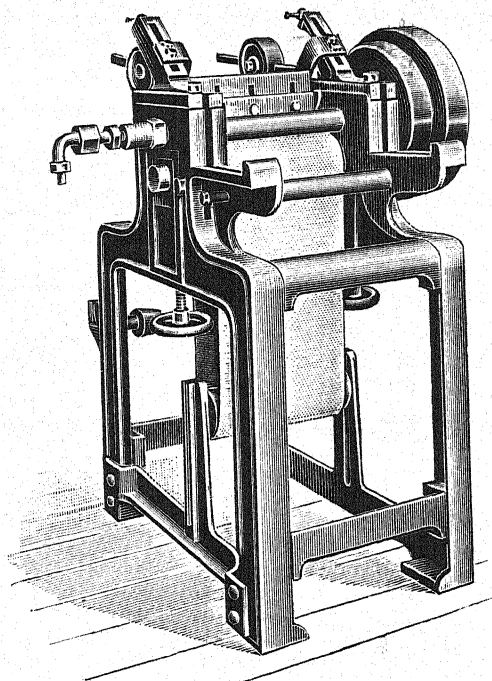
Roller printing machine. (*By W. Boulton, Ltd., Burslem.*)
